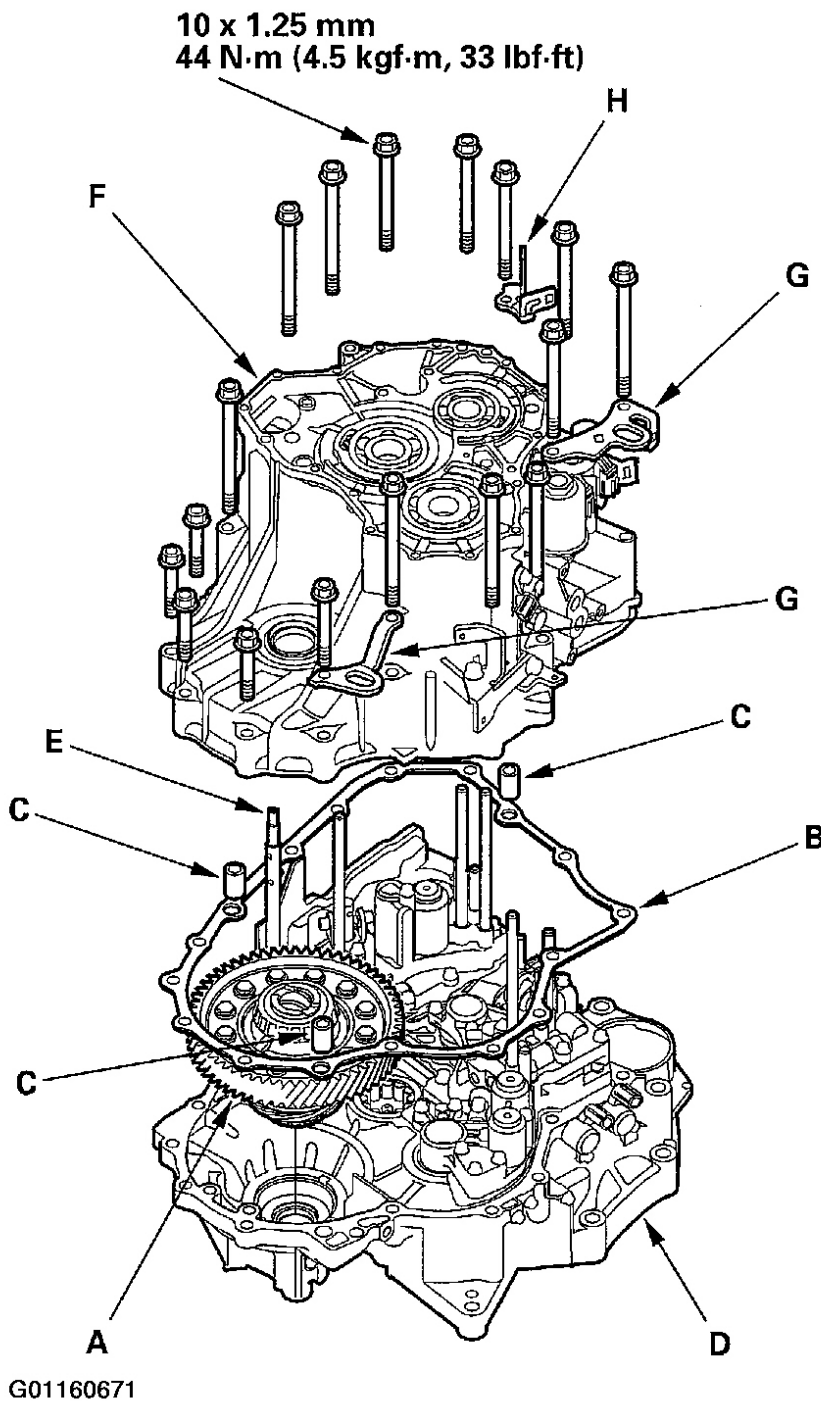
Installing Differential Assembly, Gasket & Dowel Pins
